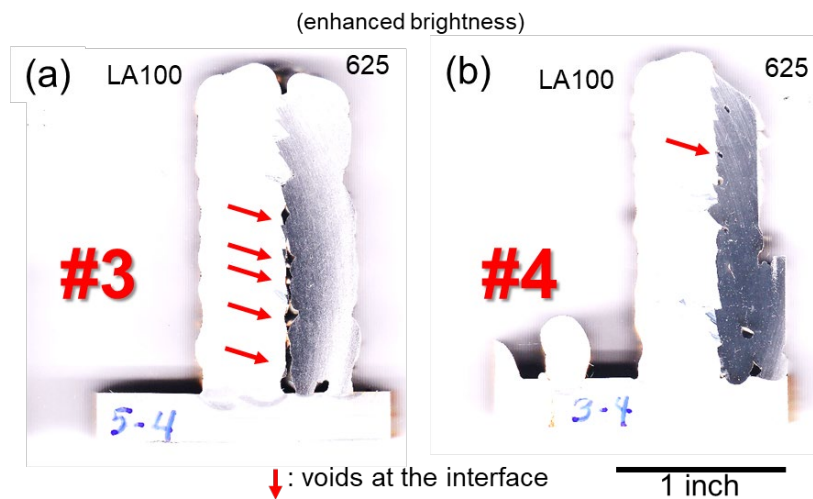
Cross-sections of the trial walls near center of the wall lengths: (a) trial wall #3, and (b) trial wall #4.
